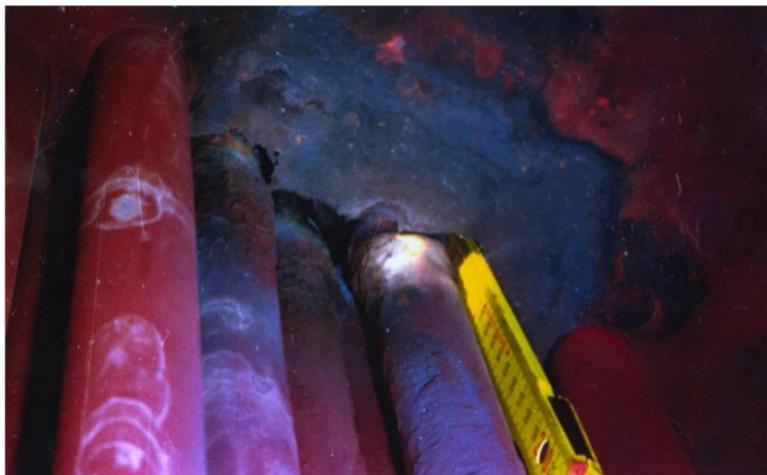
Severe corrosion of the carbon steel tubesheet due to a leak in a tube.
